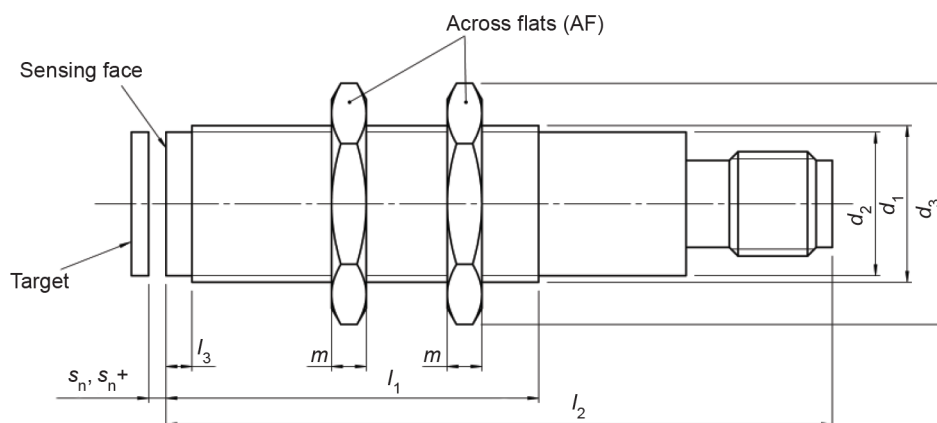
Type A dimensions – Body M5x0,5, M8x1, Ø 4, Ø 6,5 with connector M5/M8
